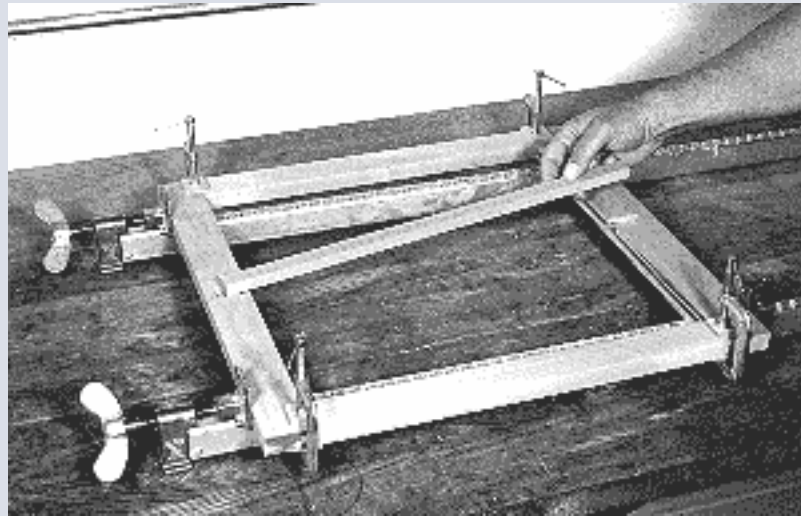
Join the drawer frames with groove and tenon joints cut at the table saw, then glue them up as shown. Install drawer guides in the front and rear pieces.
